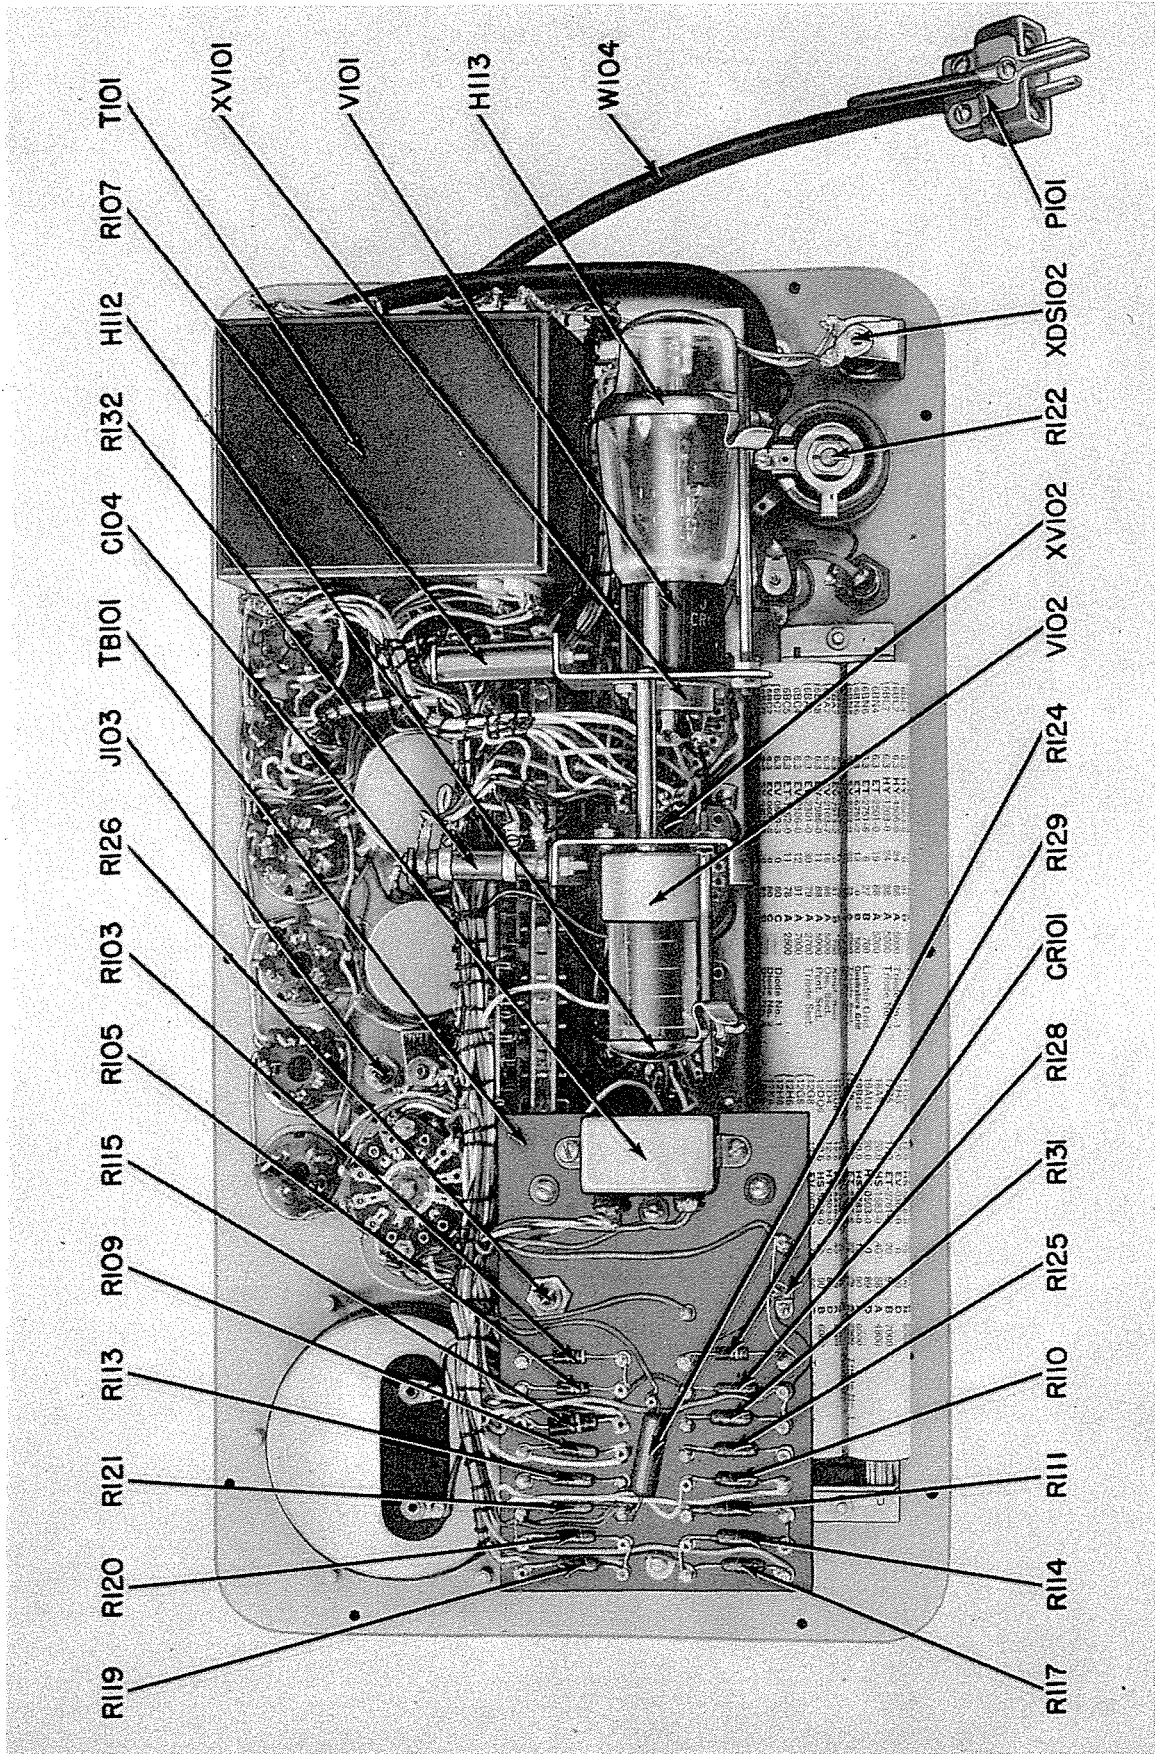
Rear View of Electron Tube Test Set, TV-10A U With Case Removed
